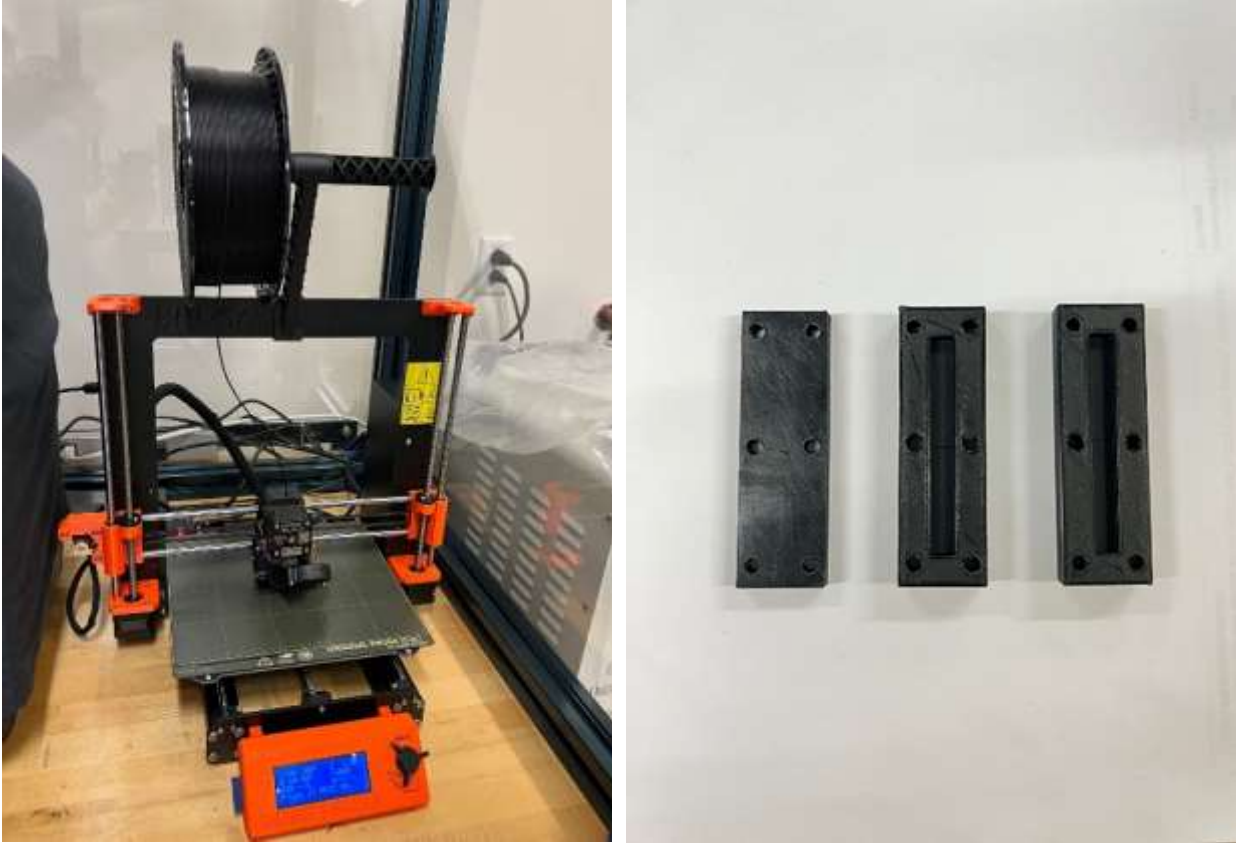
Fabricating the molds using a 3D-printer (Original Prusa i3 MK3S+) (left), and the fabricated molds (right).
